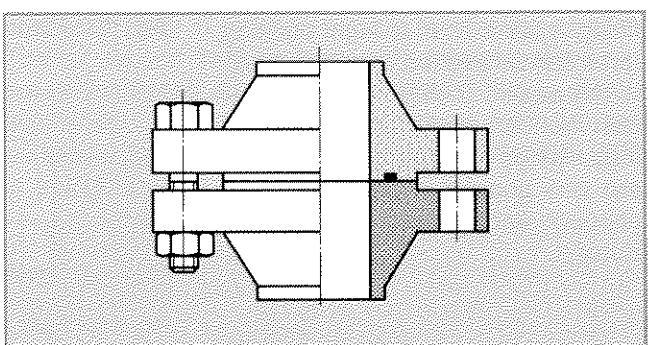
Flange with O-ring seal to DIN 2632, 2638 and 2629, securing function by screws, ground sealing surface. The large outside diameter is a disadvantage
